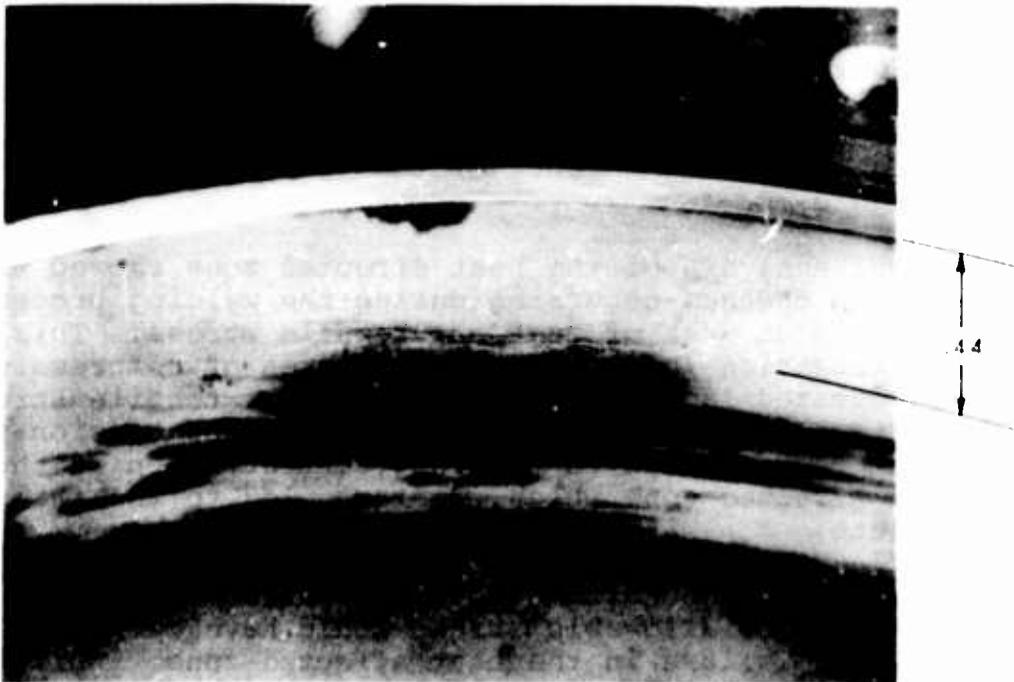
Circumferential Cracking, Second-Row Pinion Bearing Bore.
